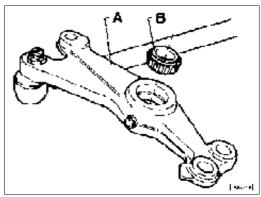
Centre steering lever. A - Centre steering lever
